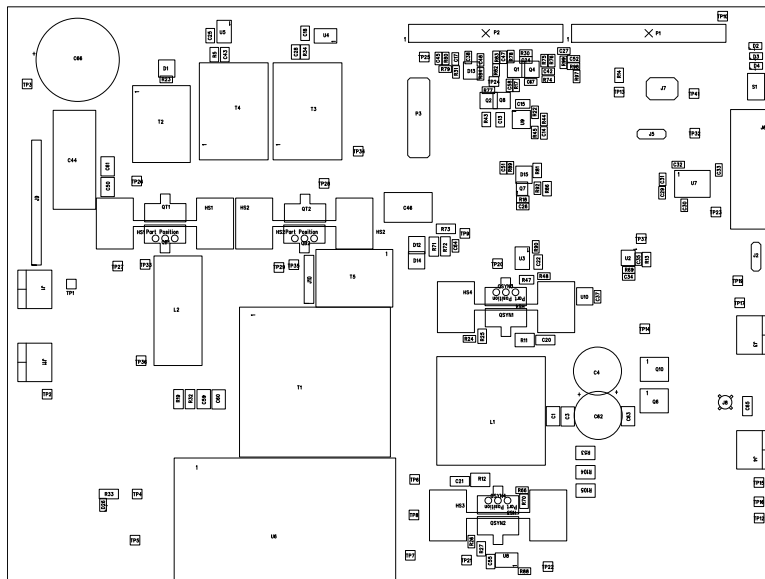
UCD3138PSFB EVM-027 Top-Layer Assembly Drawing (Top view)
